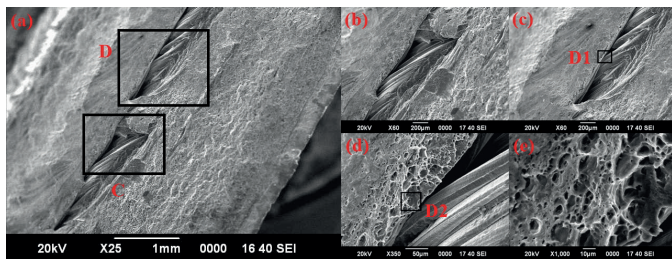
a) Fracture surface of FSW sample that failed due to tensile loading as seen under SEM; b) Magnified view of the region C; c) Magnified view of the region D; d) Magnified view of the region D1 showing the presence of dimples; e) Magnified view of the region D2 showing that the dimples are equiaxed
